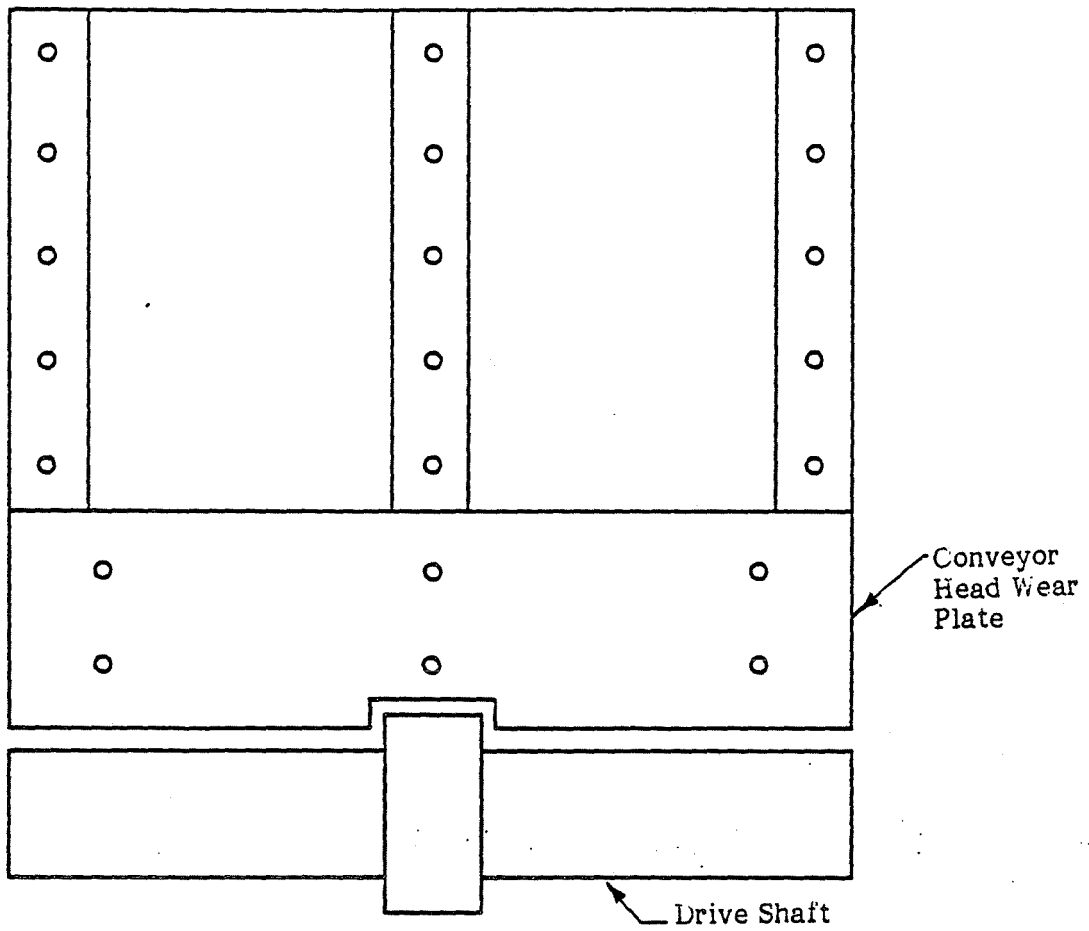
Conveyor Head Wear Plate, Top View [14, p. 13]
